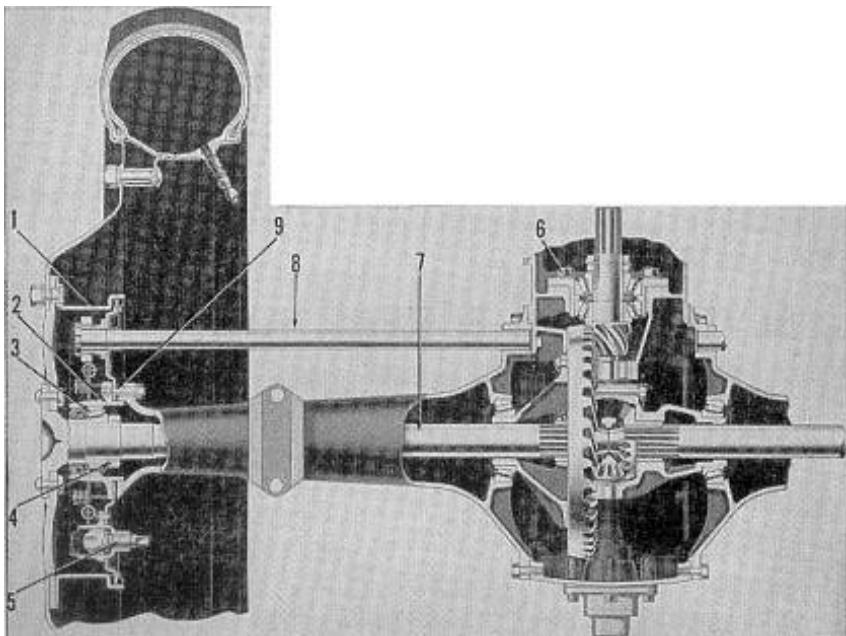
Rear axle and differential assembly as used on models 2N-9N. The 8N is similar except details of brakes and wheel axle shafts.
